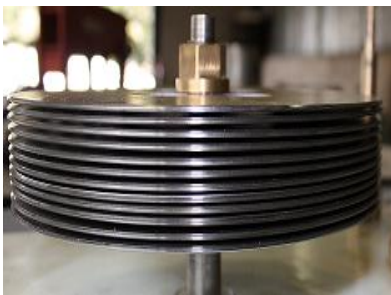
Tesla turbine rotor with disks fixed to a shaft.
